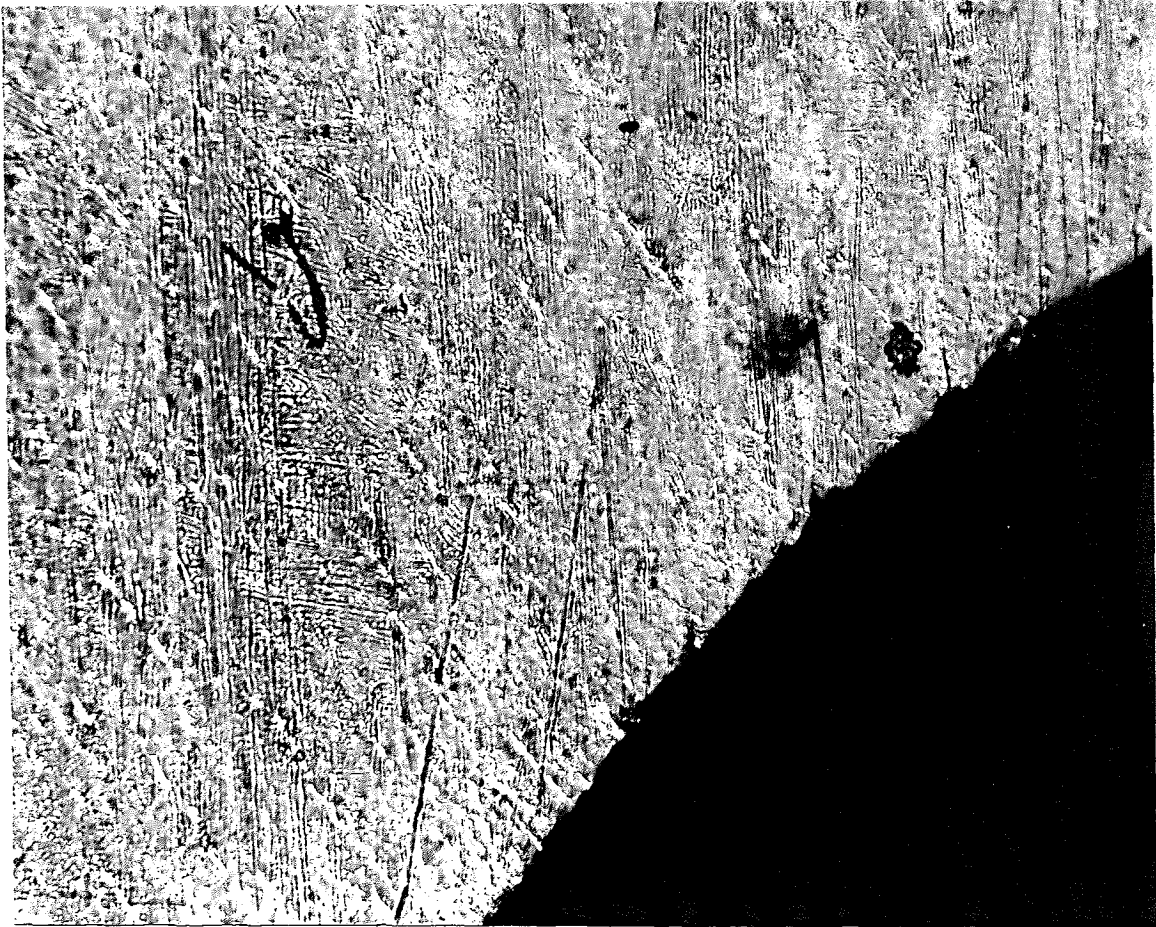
160X, Hole region of nickel silver contact spring after deburring.
